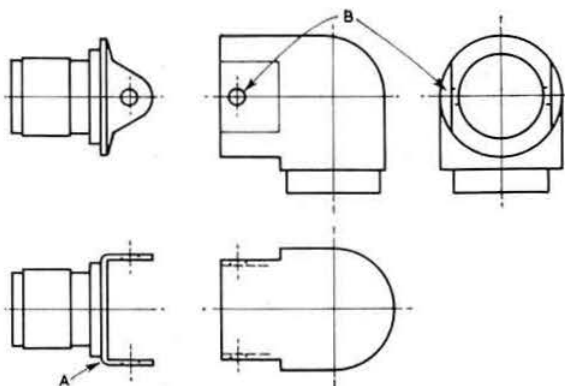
Method of mounting miniature coaxial socket on Pye plug.
